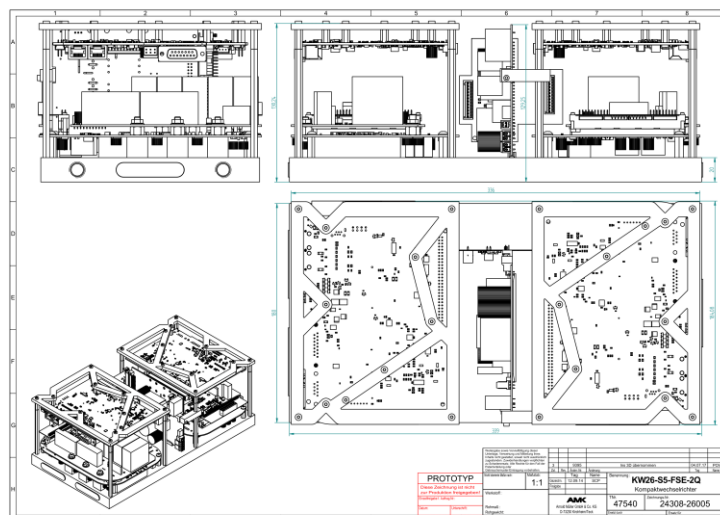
Technical drawing of the AMK KW26-S5-FSE-2Q inverter.
